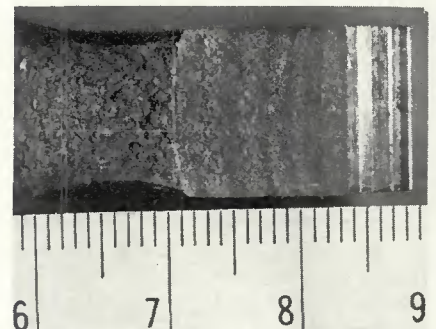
Fracture surface of the compliance calibration specimen (scale in cm)
